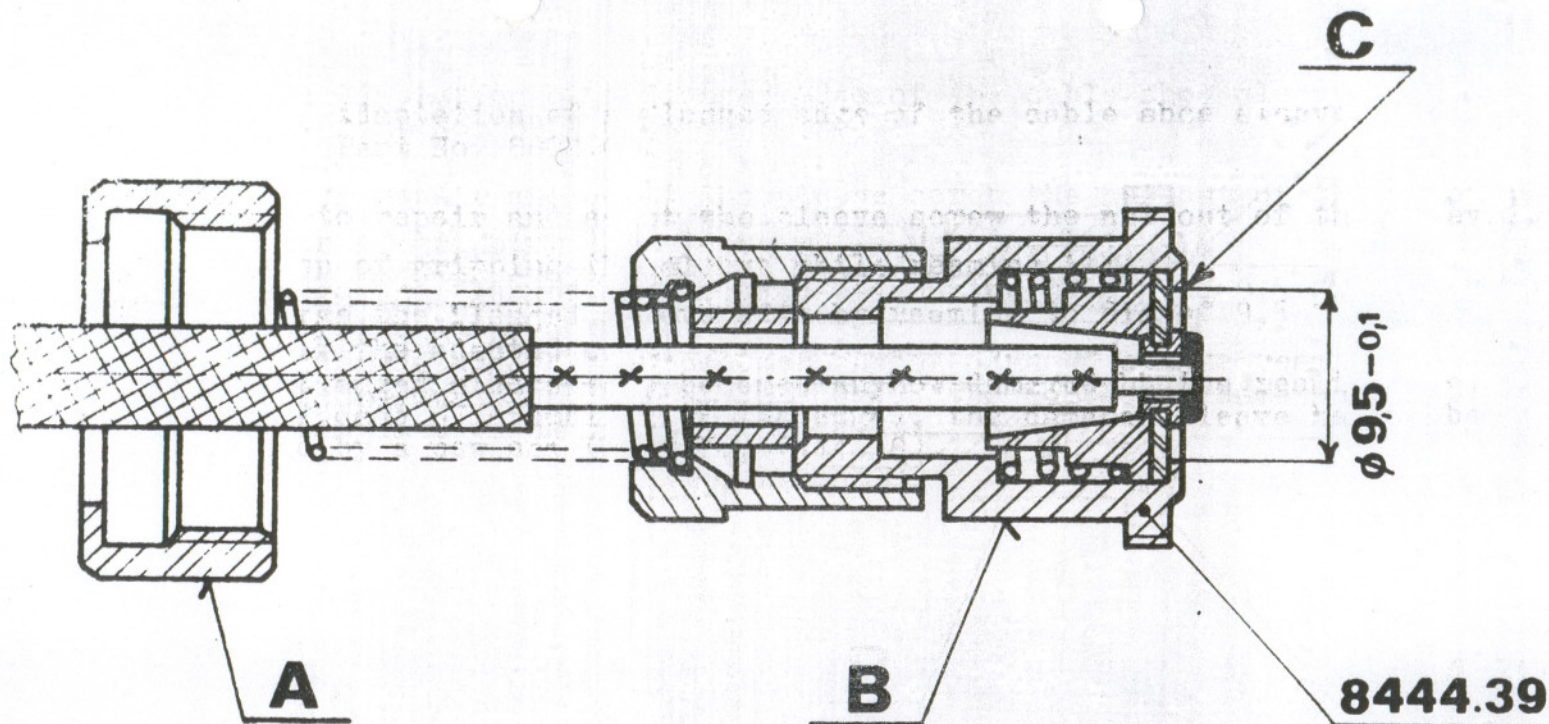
Adaptation of a flanged edge of the cable shoe sleeve,
